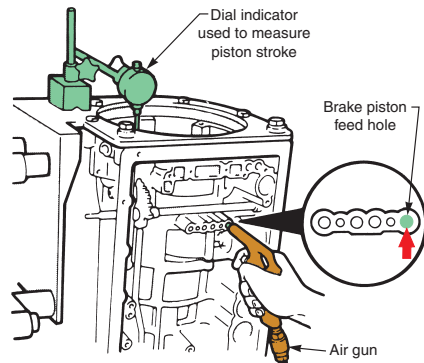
Always perform an air pressure test on the transmission before installing the valve body. Band movement or a sharp thunk from the clutch packs indicates that the air pressure is operating the holding members and that all seals and passages should channel fluid properly. (DaimlerChrysler)
